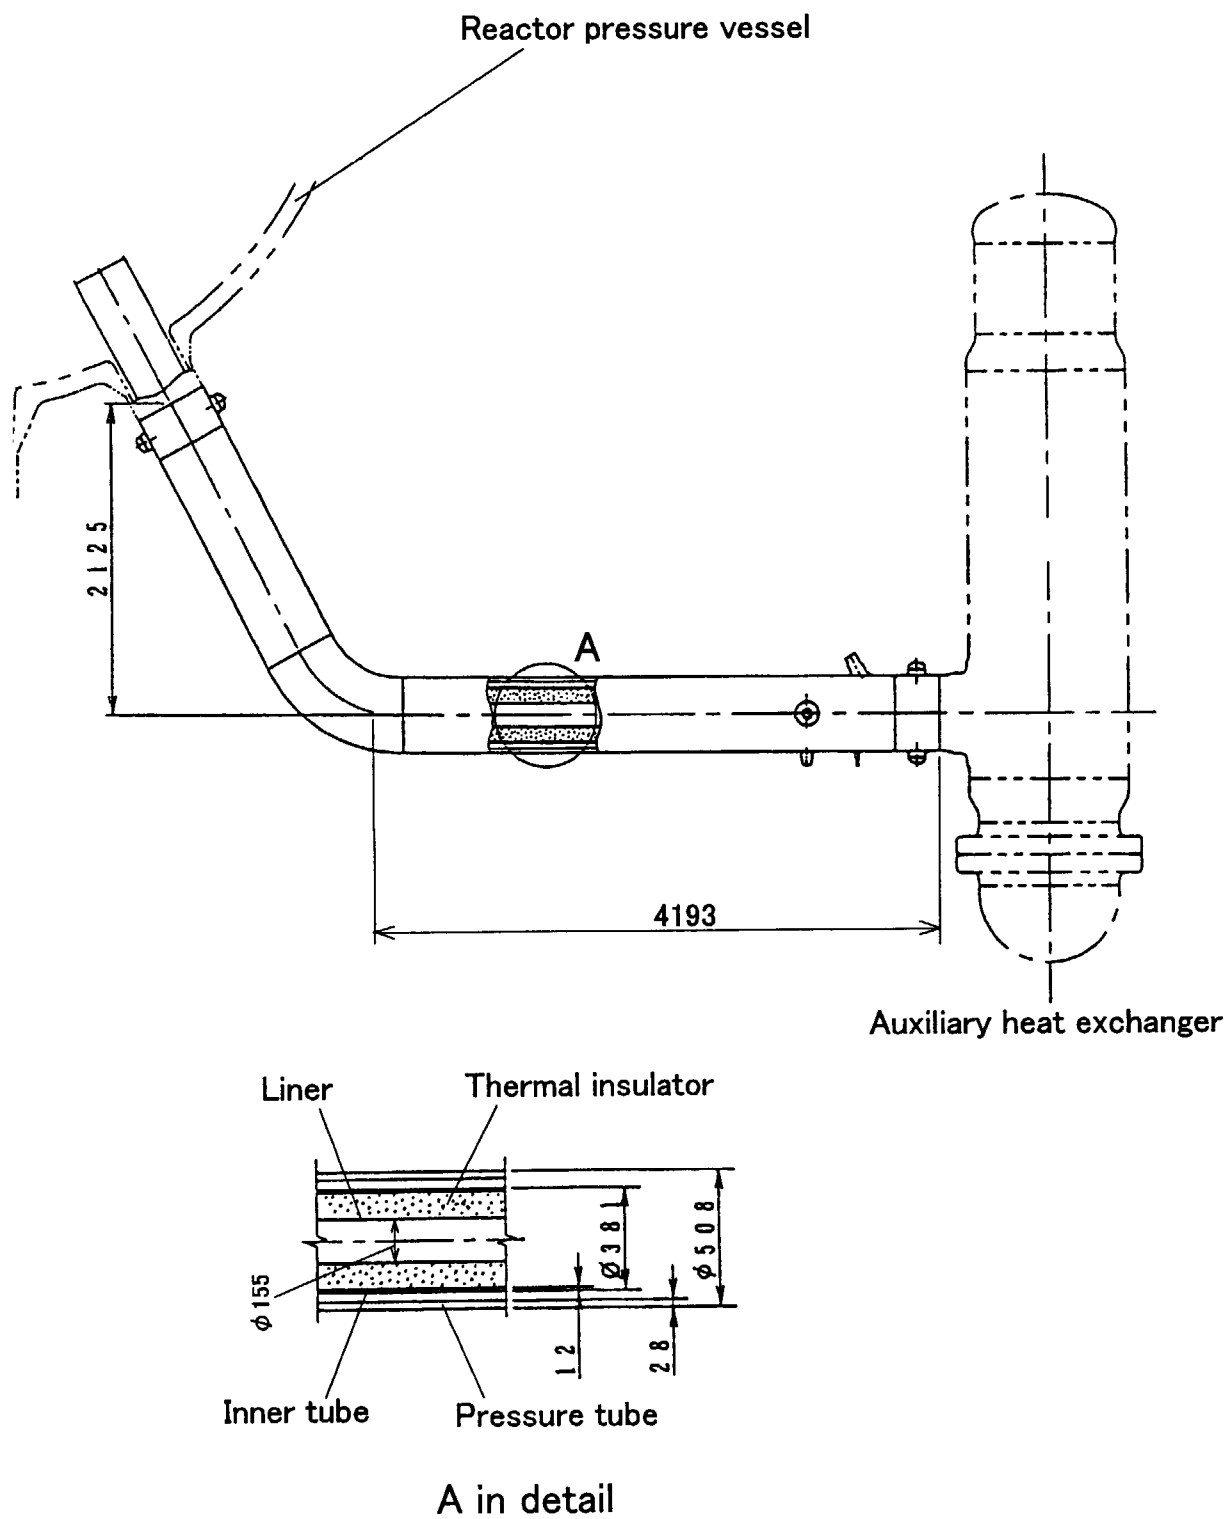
Cross-sectional view of auxiliary concentric hot gas duct
